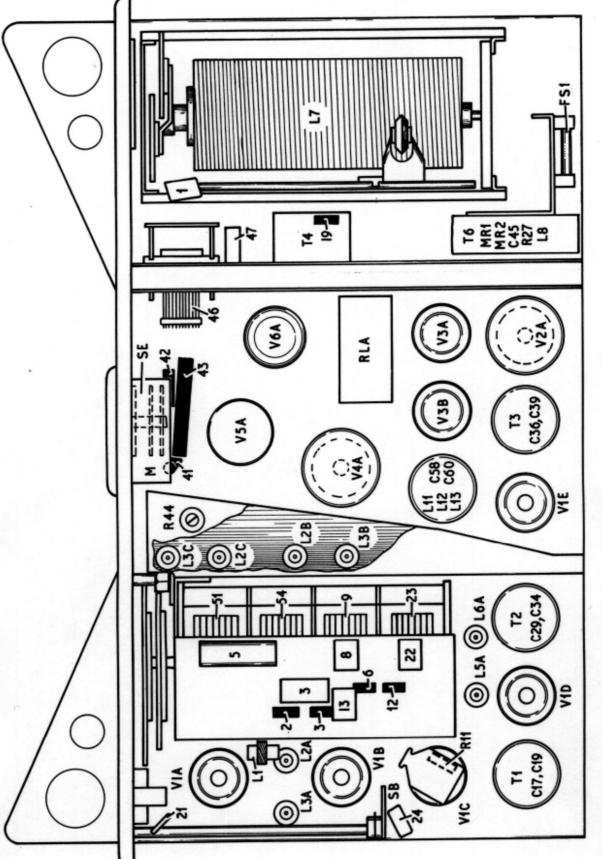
TRANSCEIVER TOP CHASSIS LAYOUT
